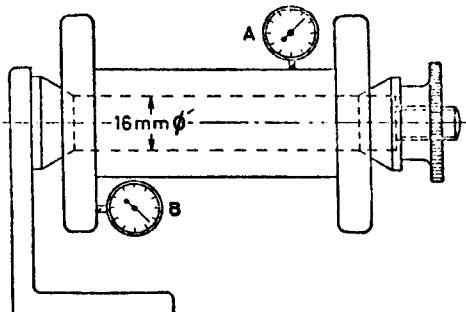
MEASUREMENT OF ECCENTRICITY AND FLANGE RUN-OUT ON REELS 160 mm DIA AND SMALLER
